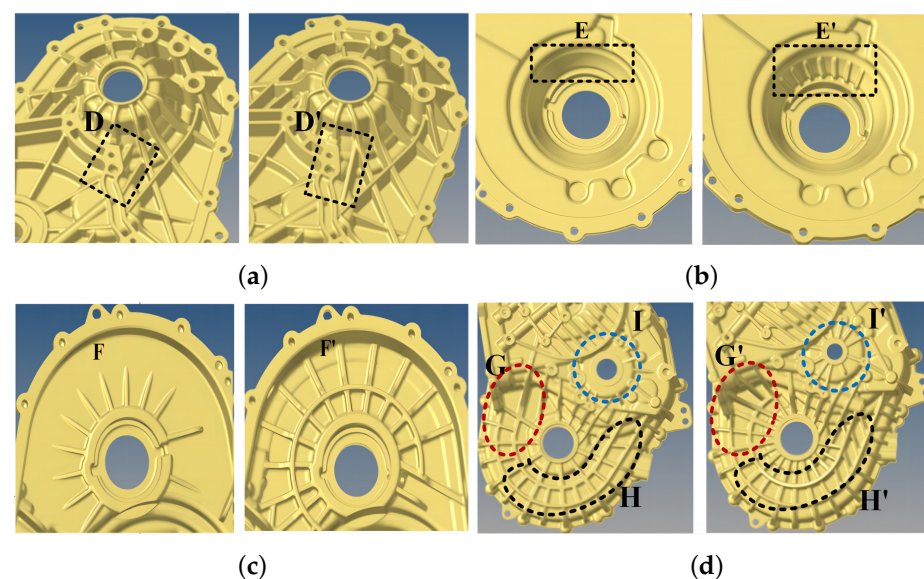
(a) Exterior of the output end of the front gearbox housing. (b) Interior of the output end of the front gearbox housing. (c) Interior of the output end of the rear gearbox housing. (d) Exterior of the output end of the rear gearbox housing.
